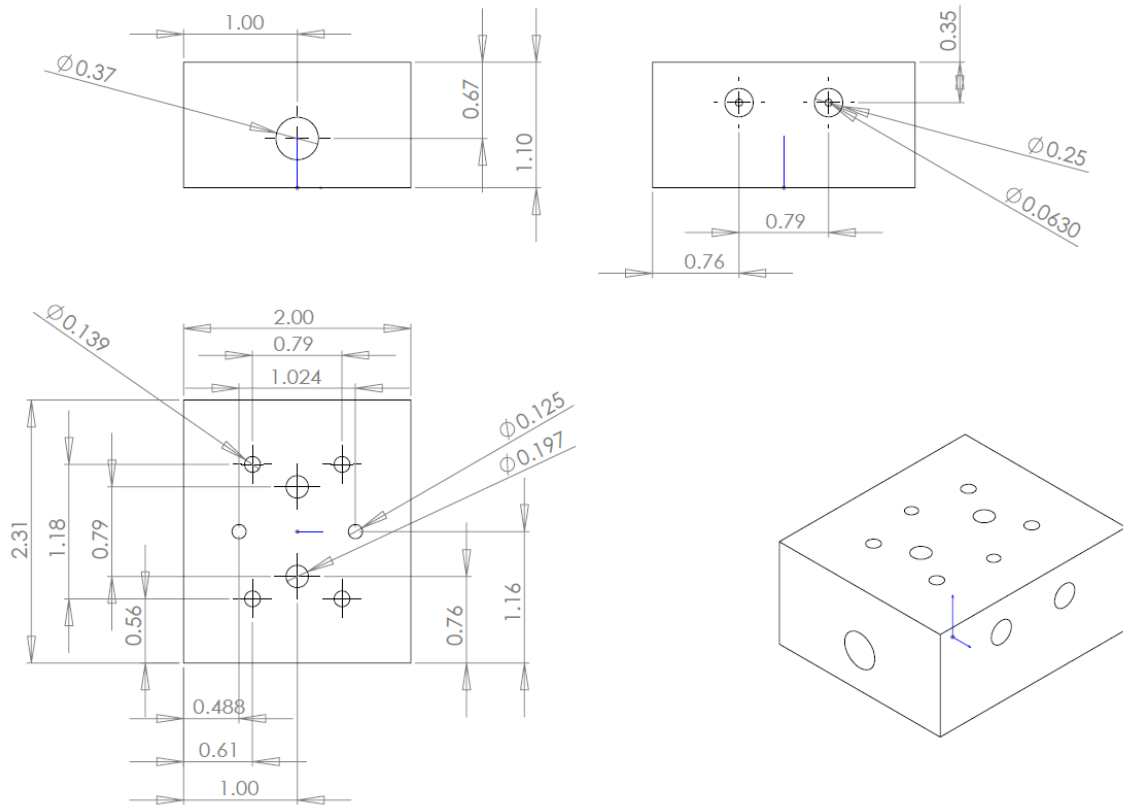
Technical drawings of the manifold base; all dimensions in inches unless otherwise specified.
